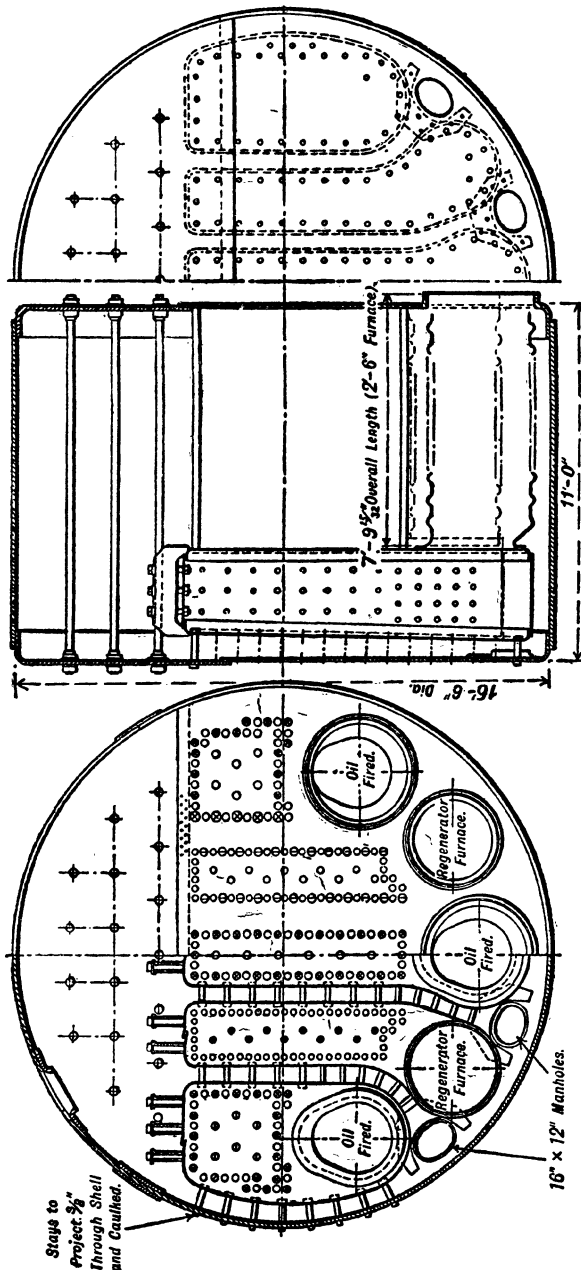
The Five-furnace Return-tube High-pressure Boiler
